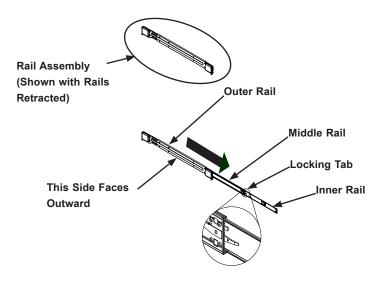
Identifying the Outer Rail, Middle Rail and Inner Rail (Left Rail Assembly Shown)
